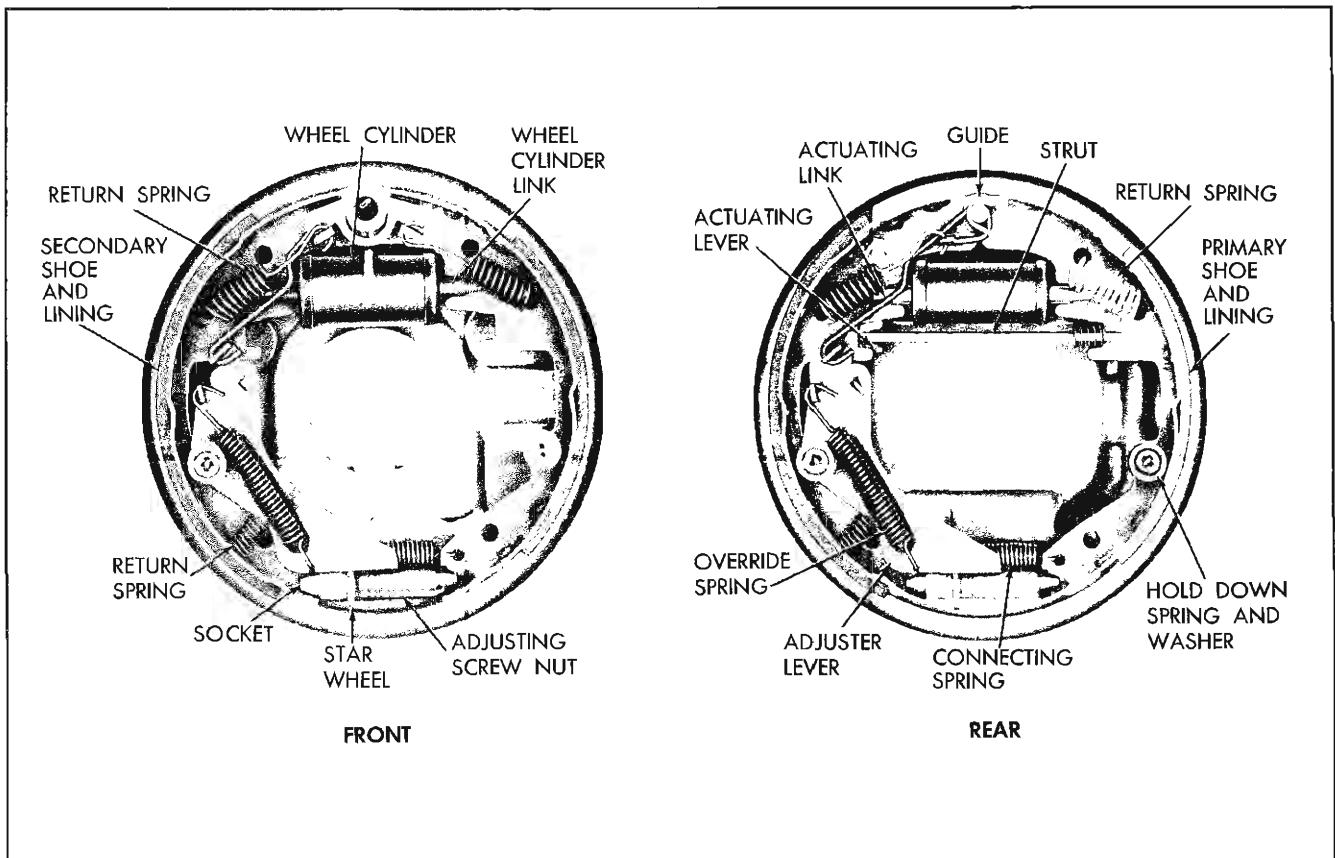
Front and Rear Self-Adjusting Brake Assemblies
